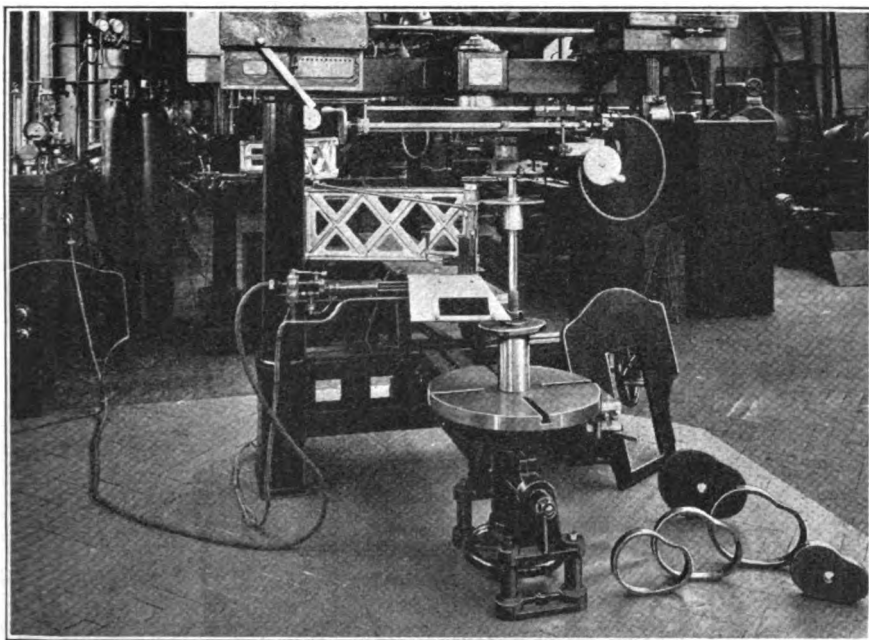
THE GODFREY OXY-ACETYLENE JET MACHINE
